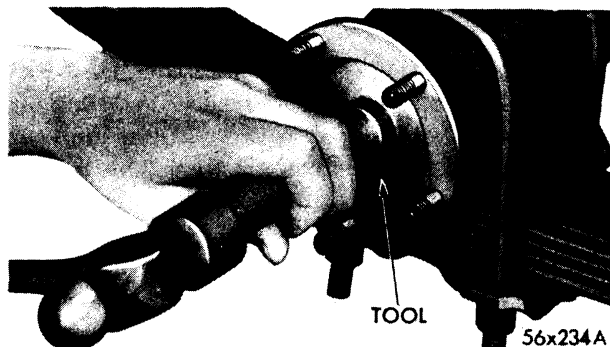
Installing Axle Shaft Inner Oil Seal with Tool C-839
